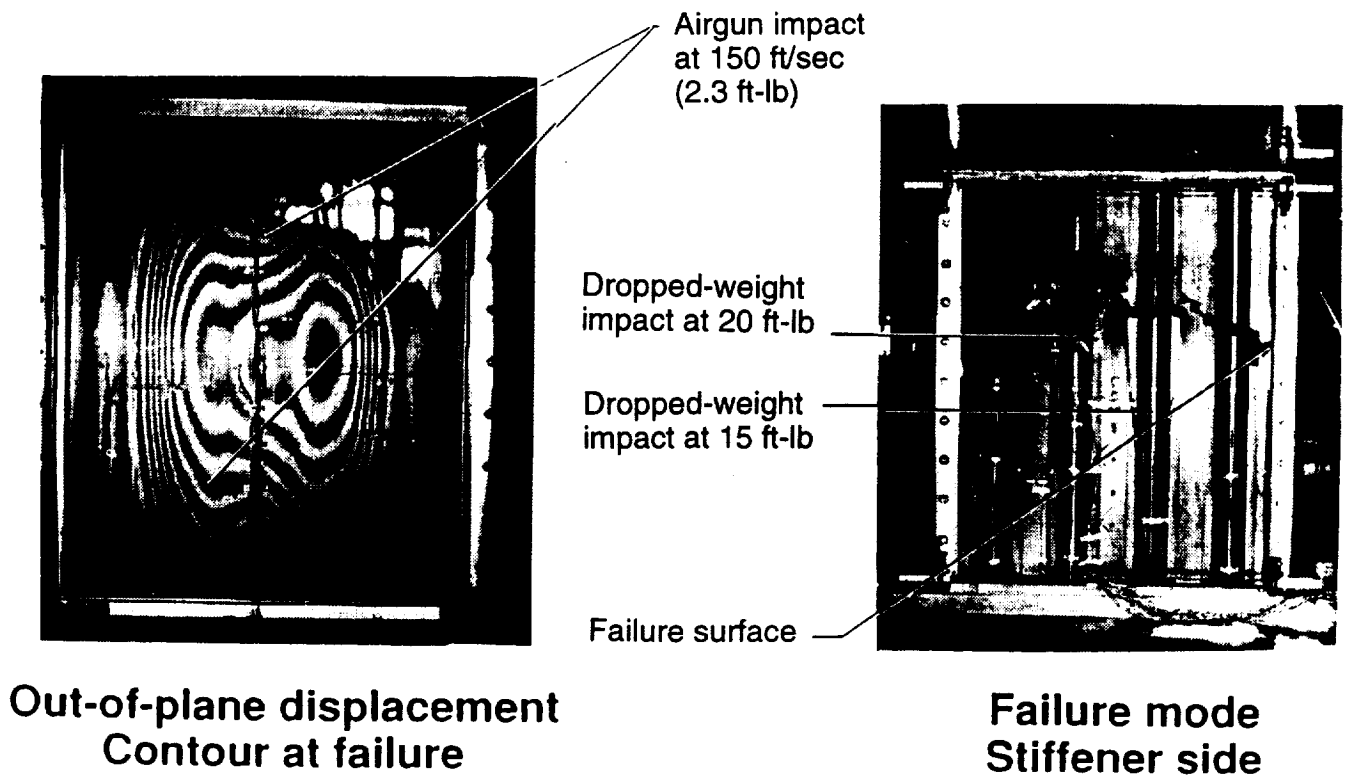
Failure mode of a multi-stiffener panel specimen subjected to airgun and dropped-weight impacts.
